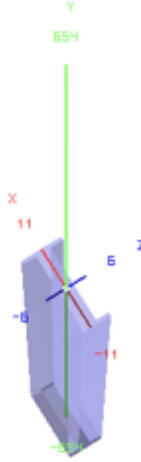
The cross-section of the cryostat I-beam. shows the cross section of the I-beam used to make this structure.
